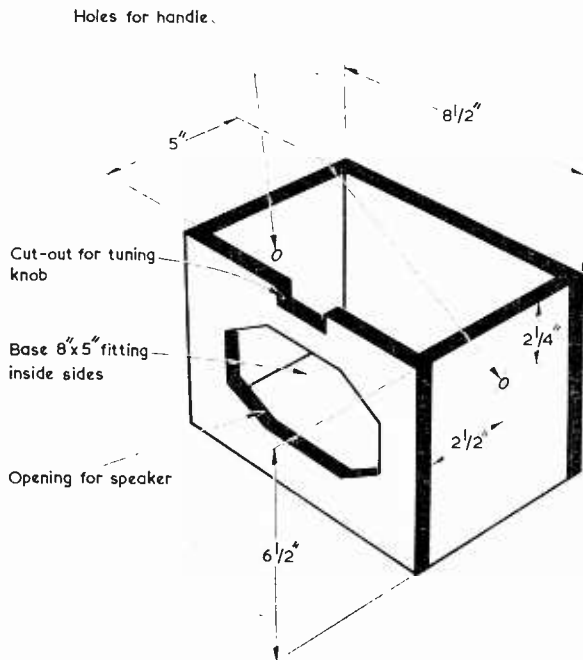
The receiver cabinet. The dimensions given here are for guidance and may require slight modification
